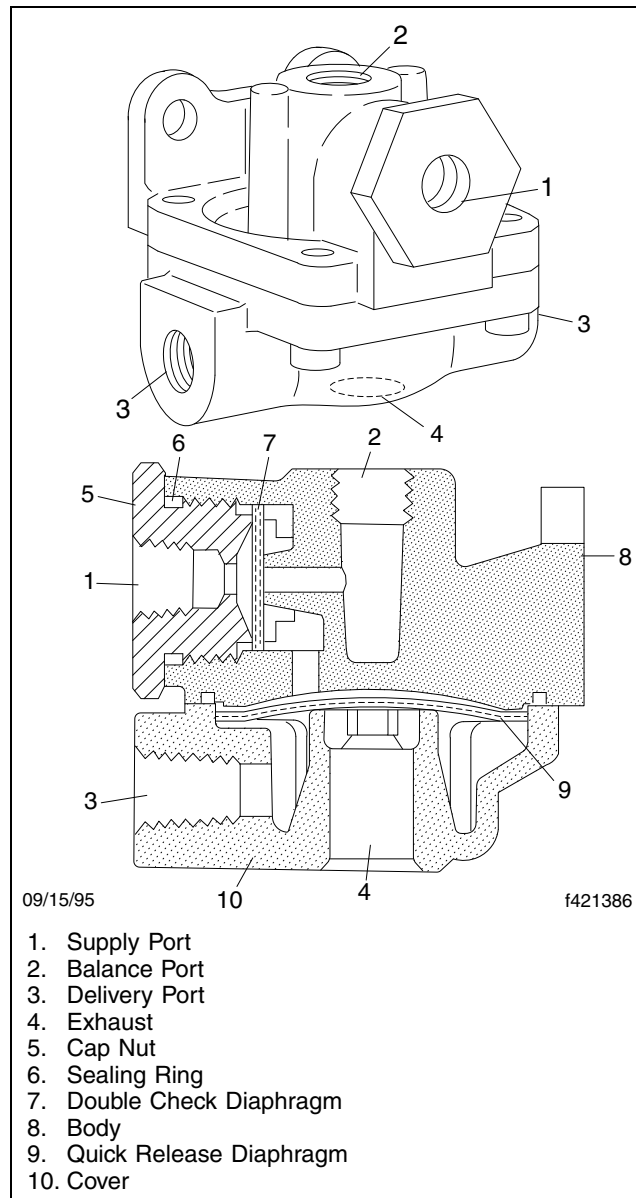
, Parking Brake Air Valve (QR-1C cross-section shown)
